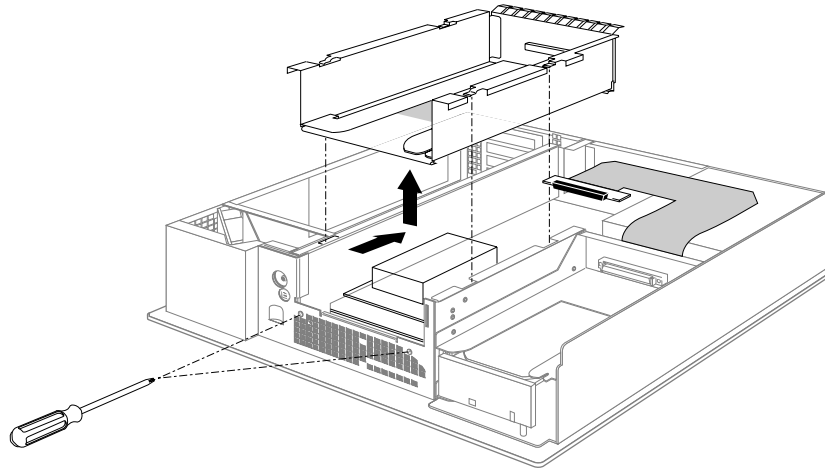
Removing the 5-1/4 Inch Drive Tray
